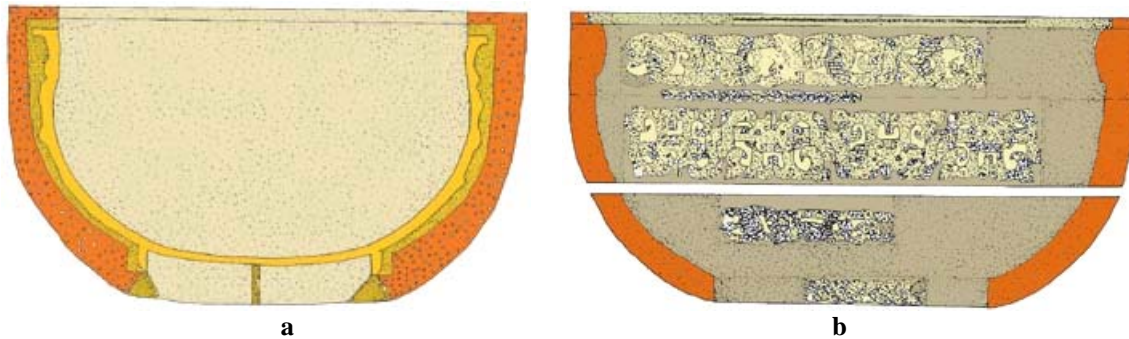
a) An undecorated mold section for casting; b) Clay strips with decorative patterns are placed in a mold mantle for casting a *jian* (water basin) [4].
